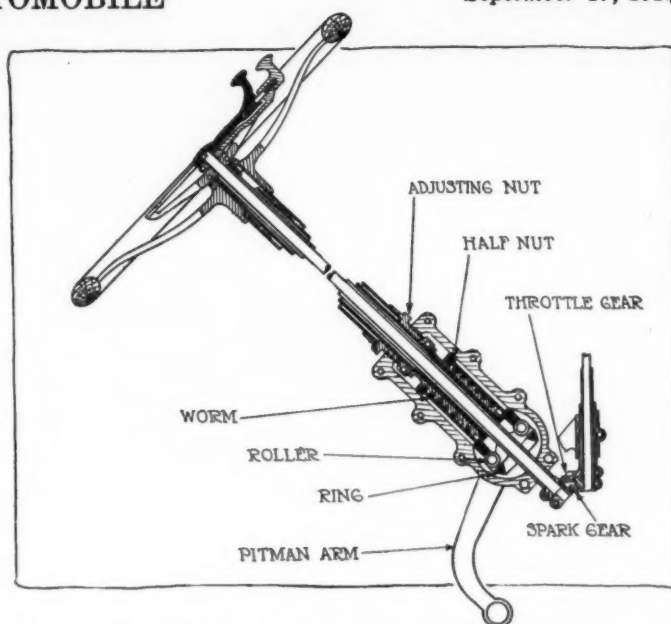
Buick model 24 steering gear showing construction and adjustment
